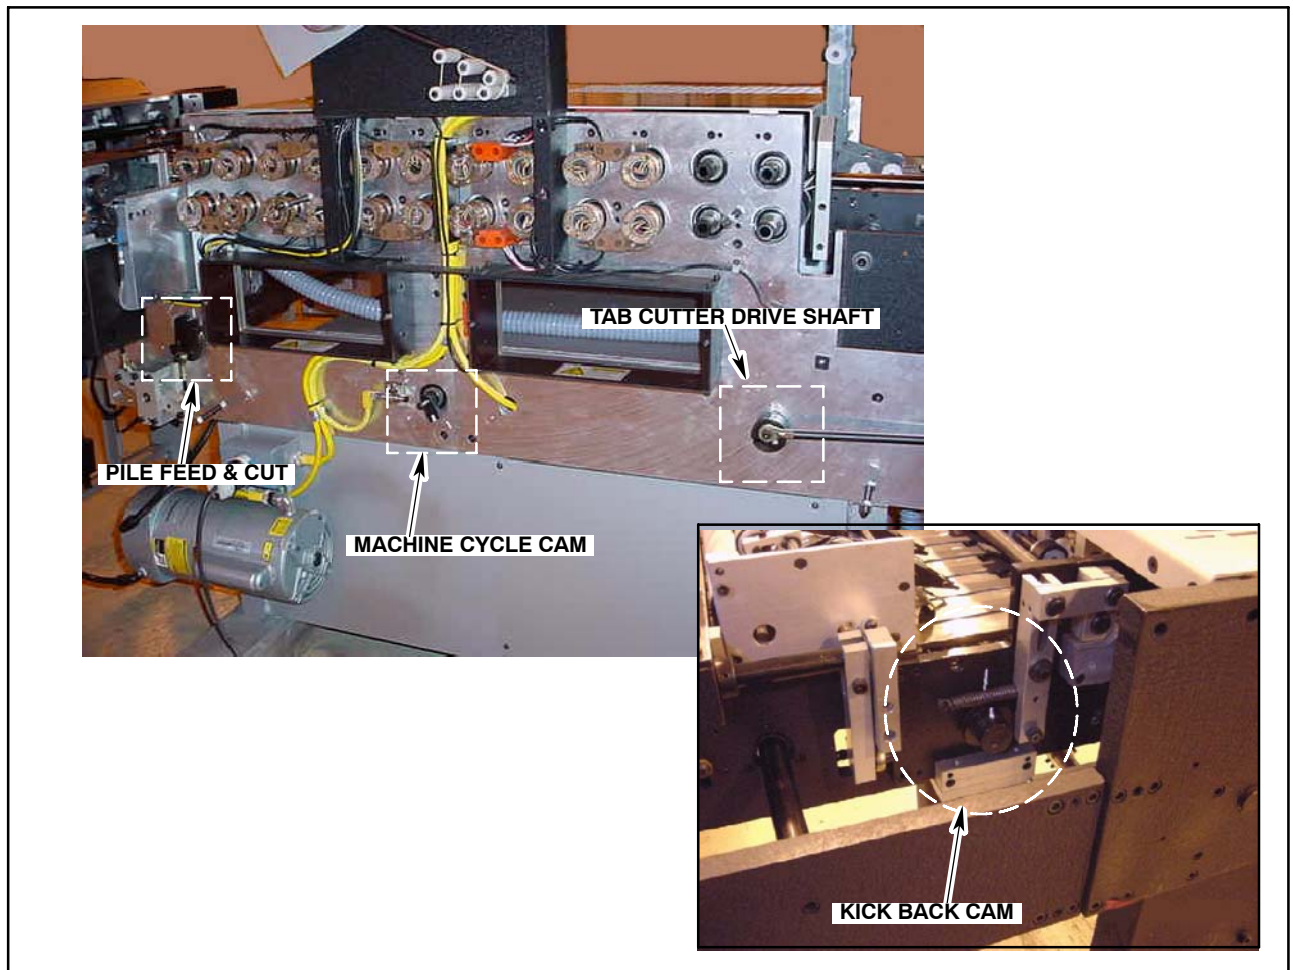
Machine Back View - Guards Must Be Removed To View Parts
